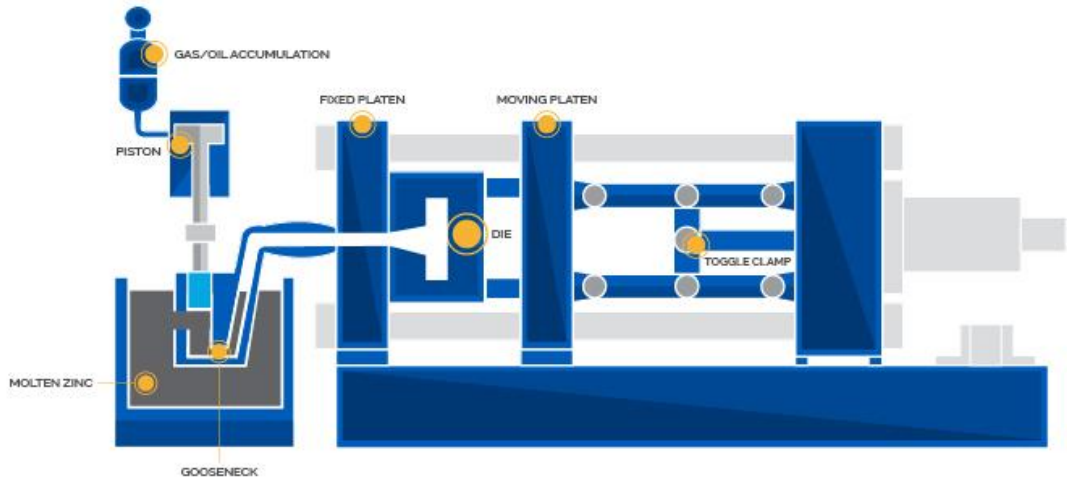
Schematic drawing of a hot chamber die casting machine [37].
